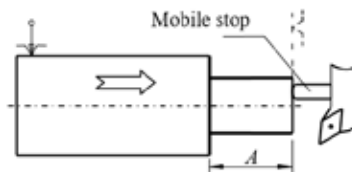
Conditional contact datum using a mobile stop.
